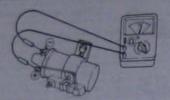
Checking ignition coll primary winding resistance (Sec 4)
